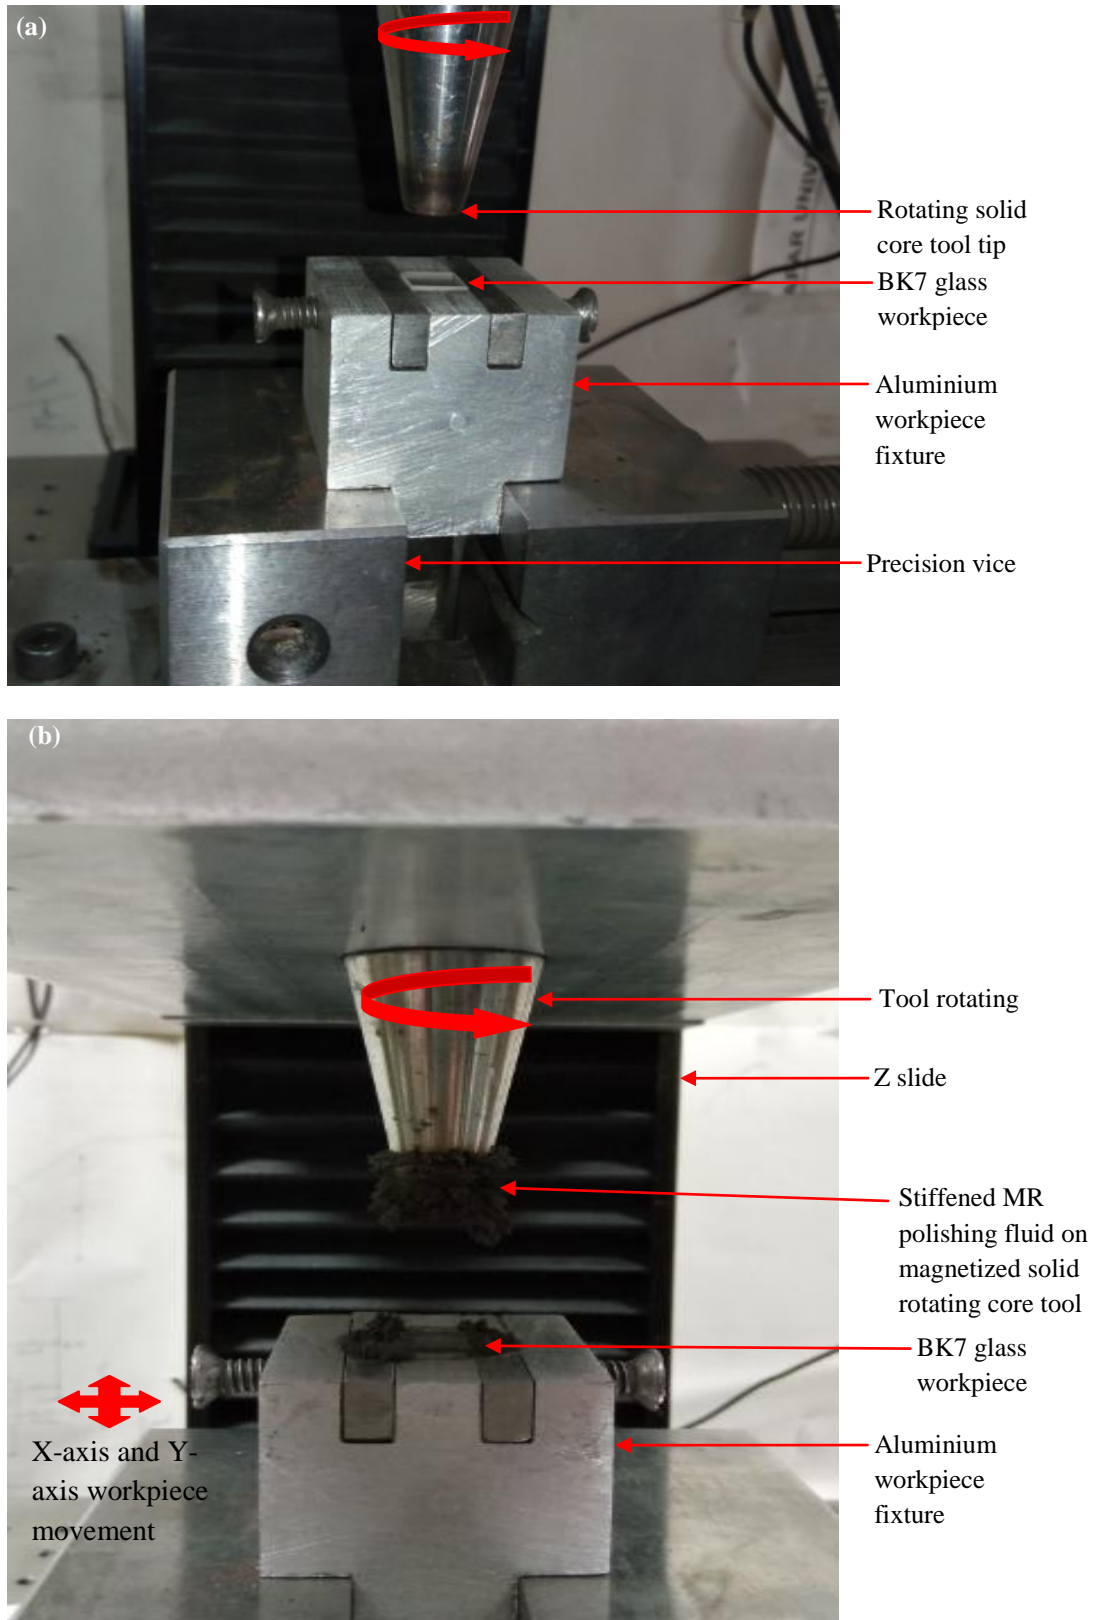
(a) Workpiece held in fixture of aluminium material and (b) MR polishing fluid on magnetised solid rotating core tool under magnetic field for finishing of BK7 glass workpiece
